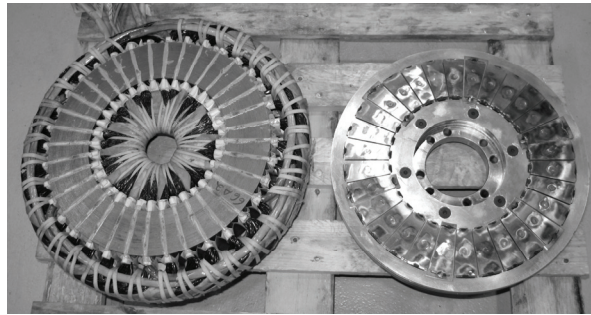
Rotor and stator of the prototype motor after winding.
